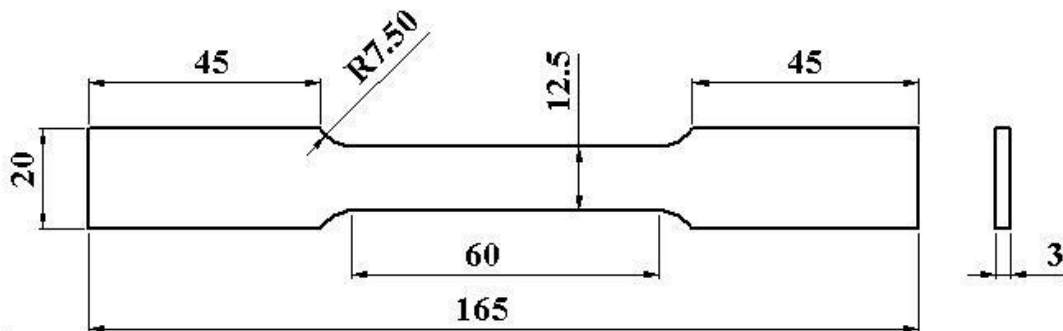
Tensile Test Specimen, ASTM D 638 - 02a, 2003. All dimensions are in mm.
